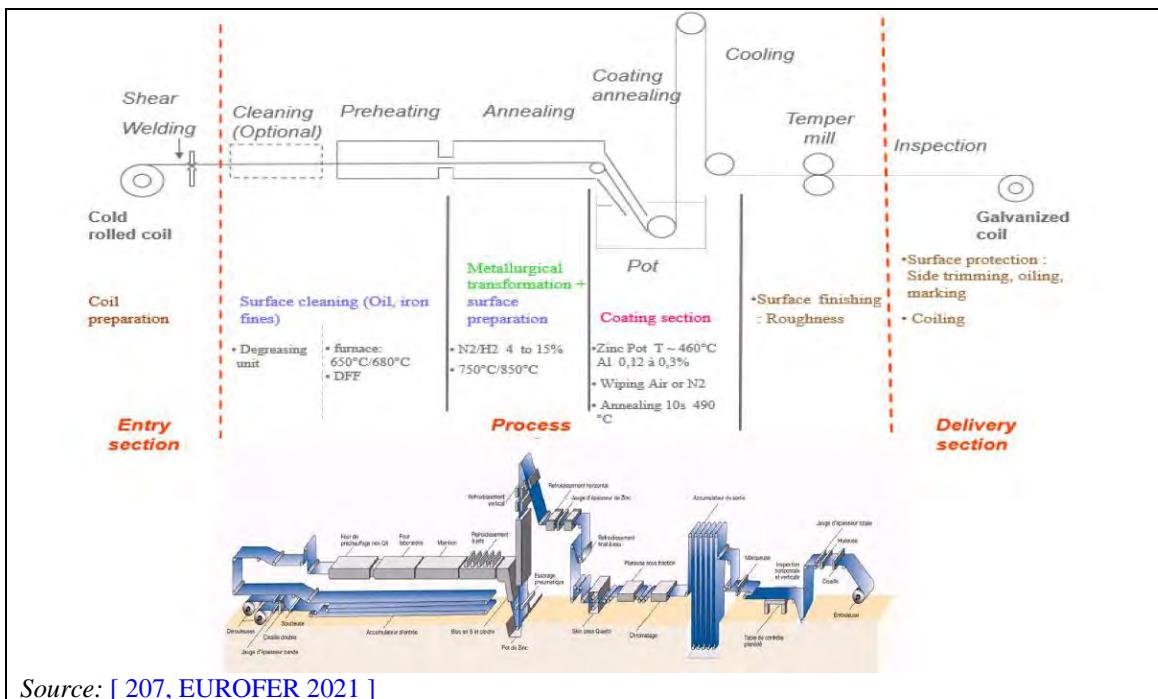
General structure of a hot dip coating line equipped with a direct flame furnace for processing hot rolled coils and cold rolled coils
